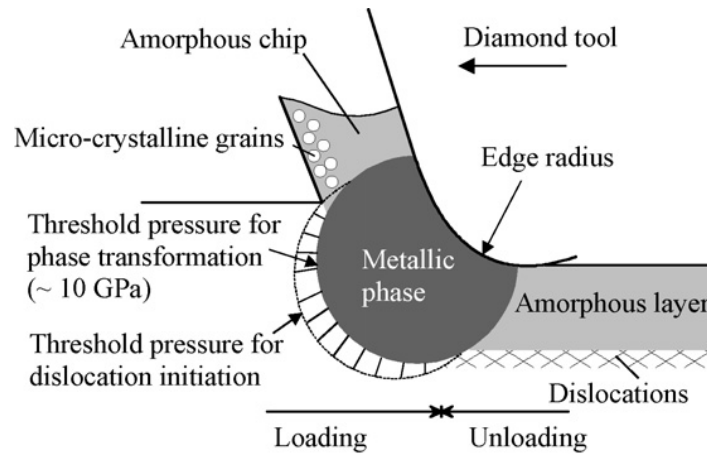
Schematic model for subsurface damage mechanism in Si during ductile machining.
